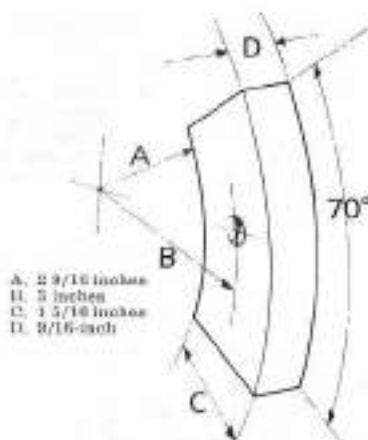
View showing thrust pad which can be fabricated locally and used to pull wheel axle shaft from bearings, spacers and axle gear. Dimensions are indicated in legend.
